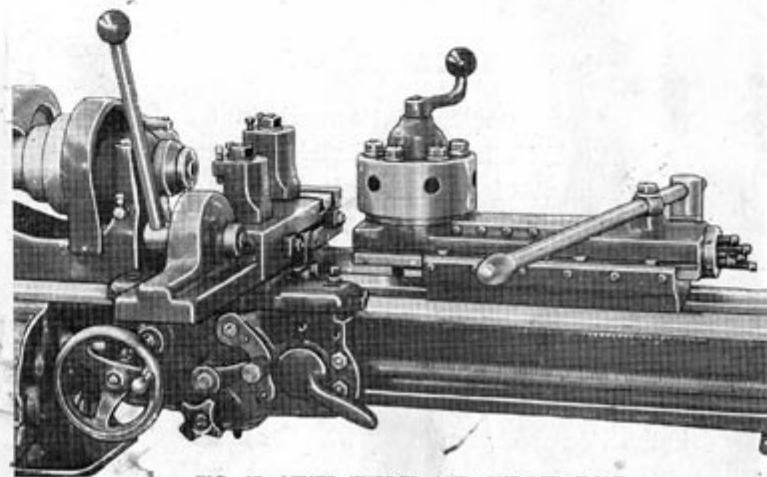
LEVER TURRET AND CUT-OFF SLIDE.
